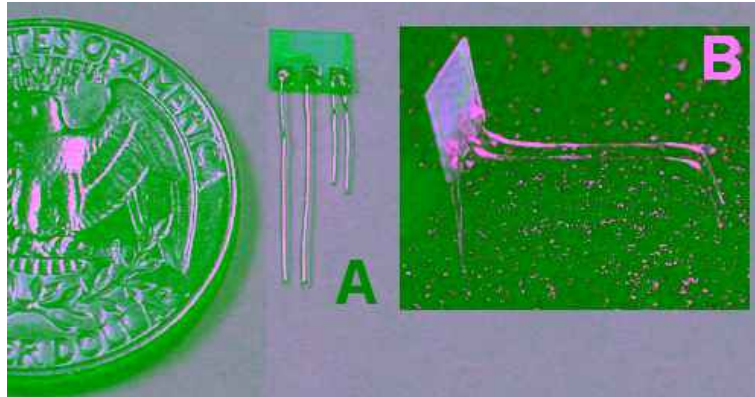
Wire electrodes soldered on a PCB (A) and bent into a three-dimensional shape
